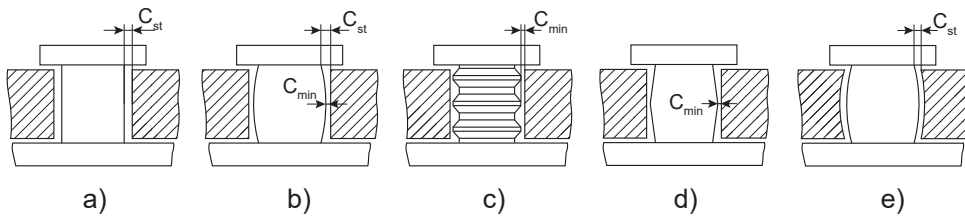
Different proposed shapes for a pin-joint in order to minimize the clearance in the mechanism. a) A standard pin joint shape with standard clearance (C_{st}). b) A drum-shaped pin-joint in which the minimum clearance (C_{min}) is smaller than the standard clearance. c) A worm-shaped pin-joint. d) A drum-shaped pin-joint with a sharp transition. e) A drum-shaped pin-joint with a constant clearance. Adapted from [17,30,37-39,43].
